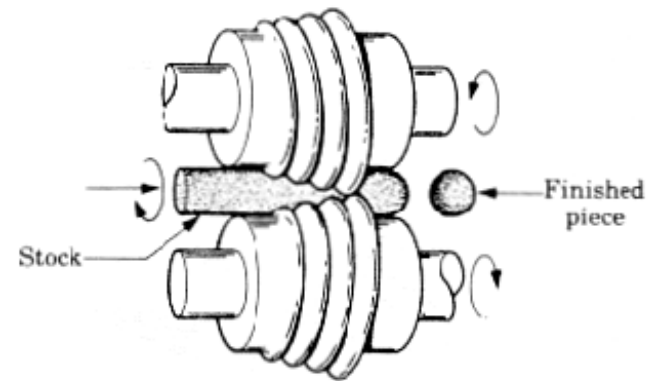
Production of steel balls for bearings by the skew rolling process. Balls for bearings can also be made by the forging process shown in Fig. 6.22.
